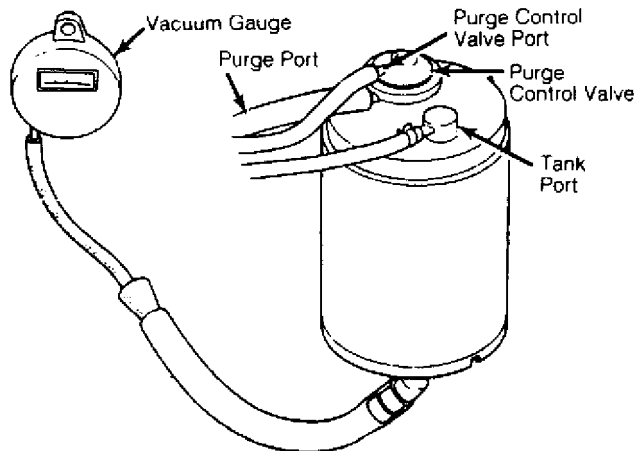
Testing Charcoal Canister & Purge Control Valve
